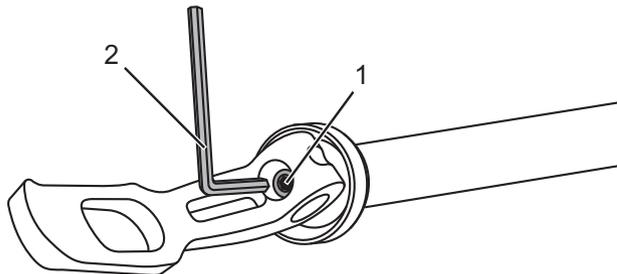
Setting the clamping force in the middle of the clamping lever (1) with a hexagon socket spanner (2)
